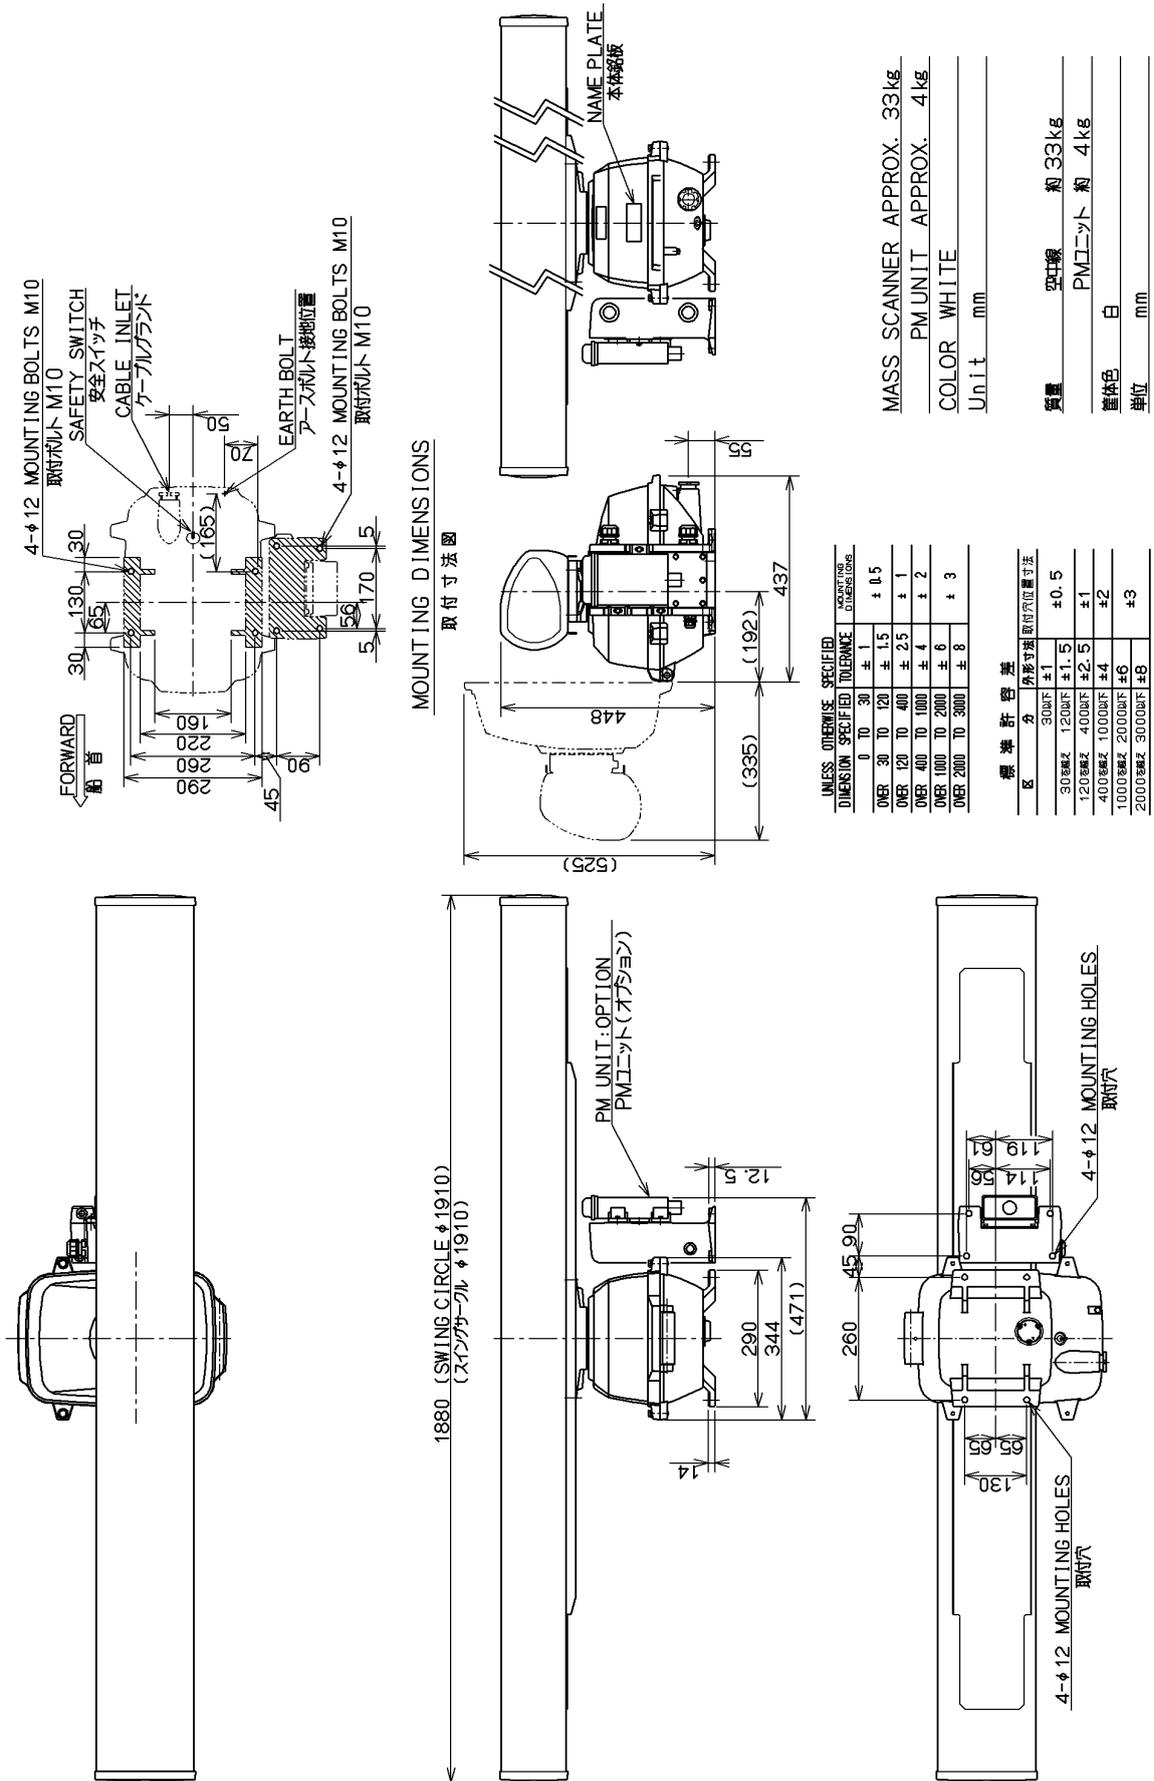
Exterior Drawing of Scanner Unit, Type NKE-2102-6
